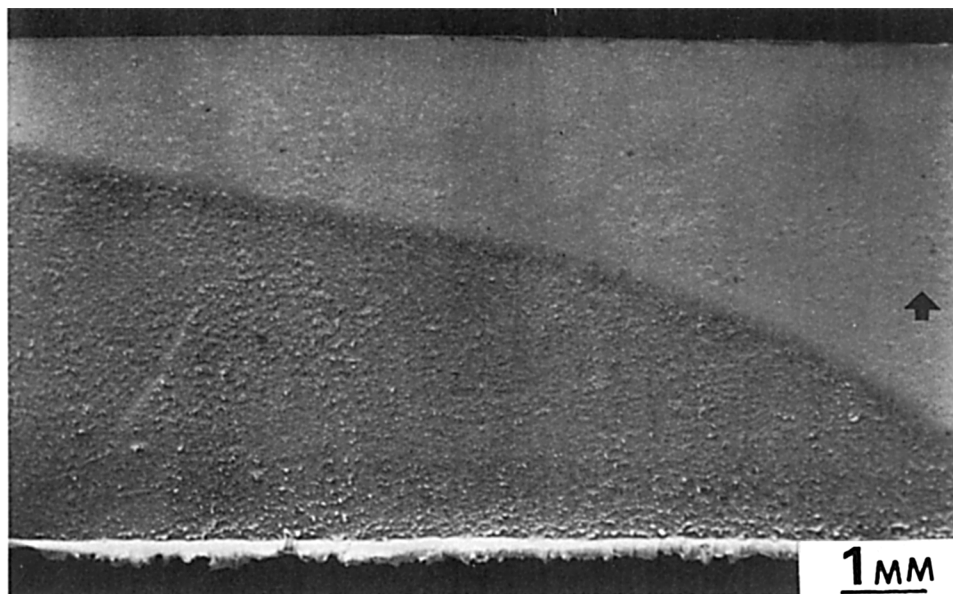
Fractured surface of weld contaminated by Teflon and welded at 0.31 MPa. Arrow shows direction of crack growth.
